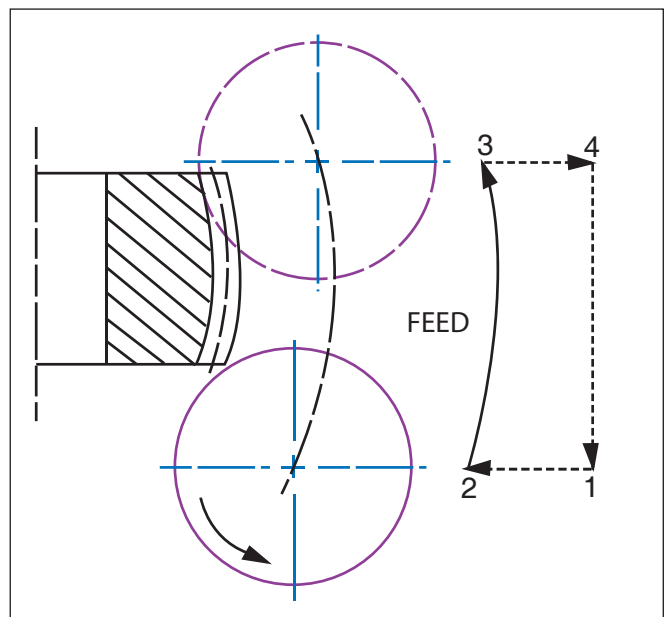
Traditional method for lead crown correction with a circular tool. Traditional path of hob, threaded wheel grinding and form grinding tools. This method of crowning will create bias error.
